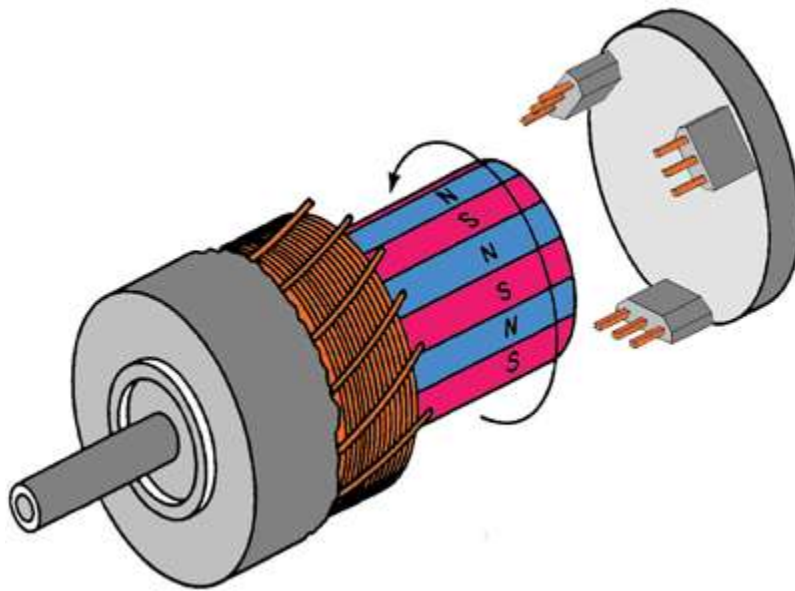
A typical brushless motor with stator mountable Hall effect sensors
